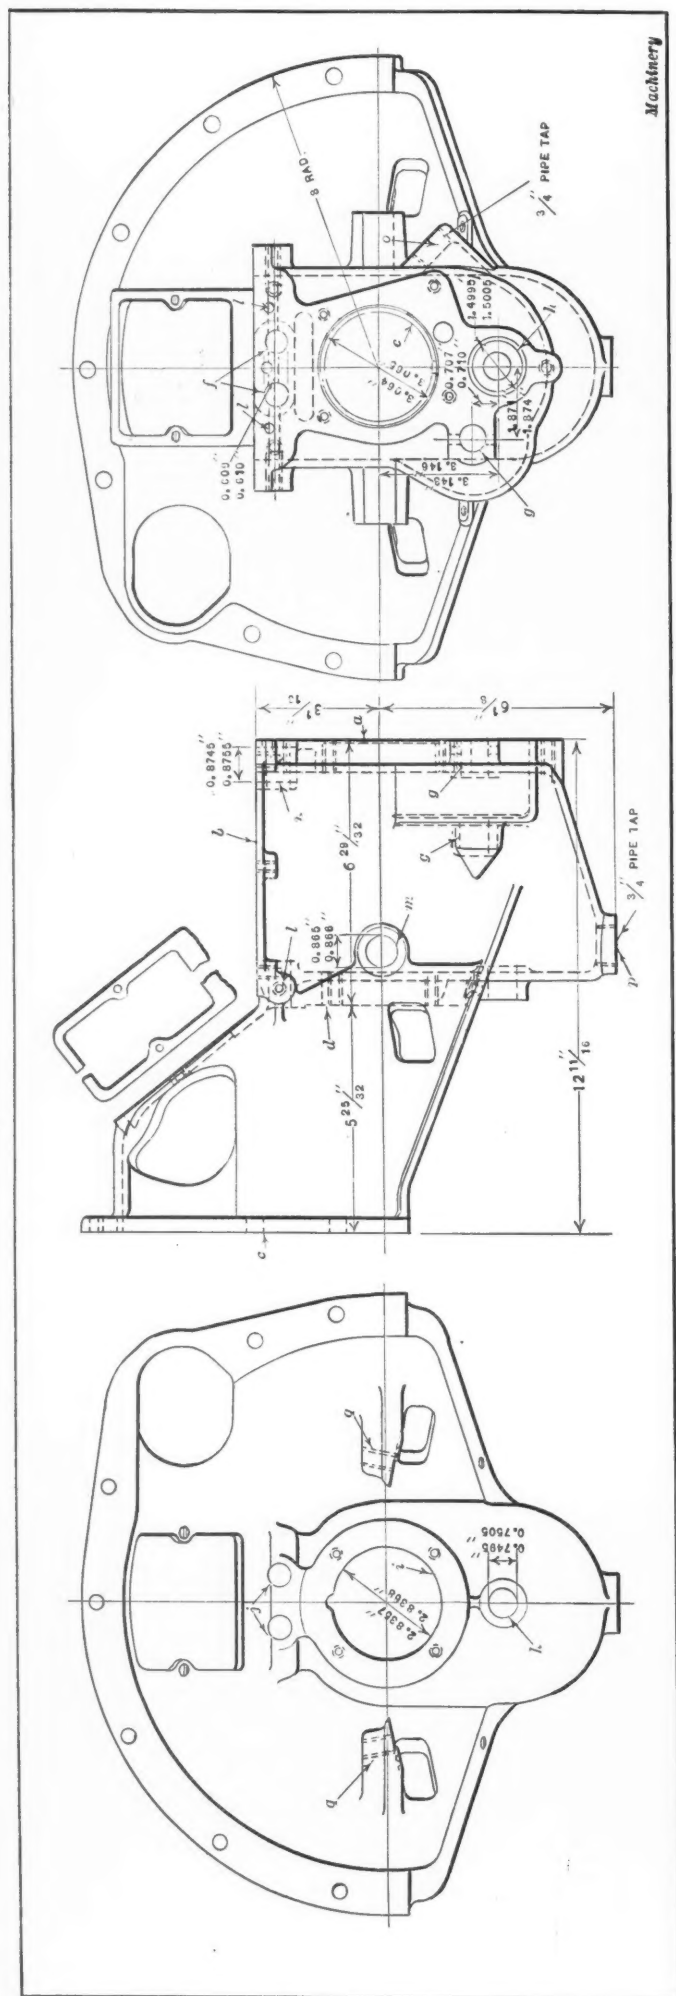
Detail Views of the Transmission Case with which Ajax Automobiles are equipped
